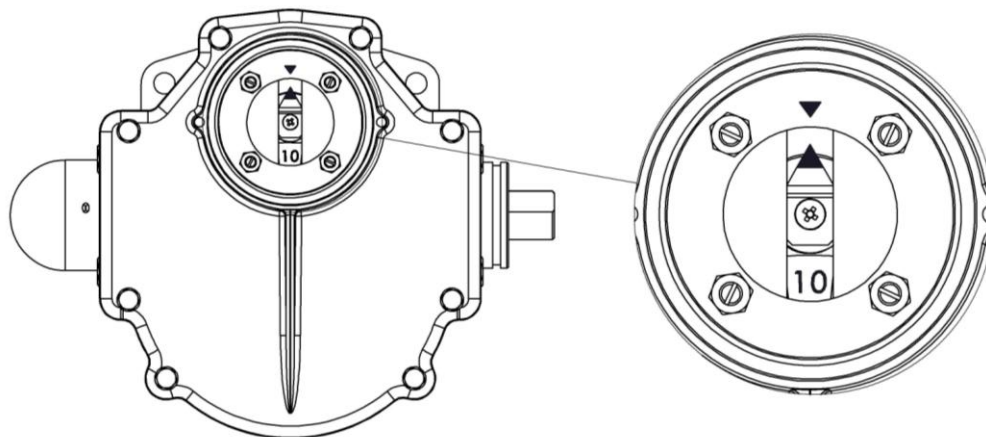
Position indicator of the worm gear box showing Tap Position 10
